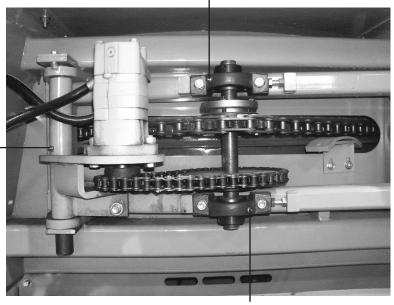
tub drive - orbit motor bracket and drive shaft bearing lubrication points
